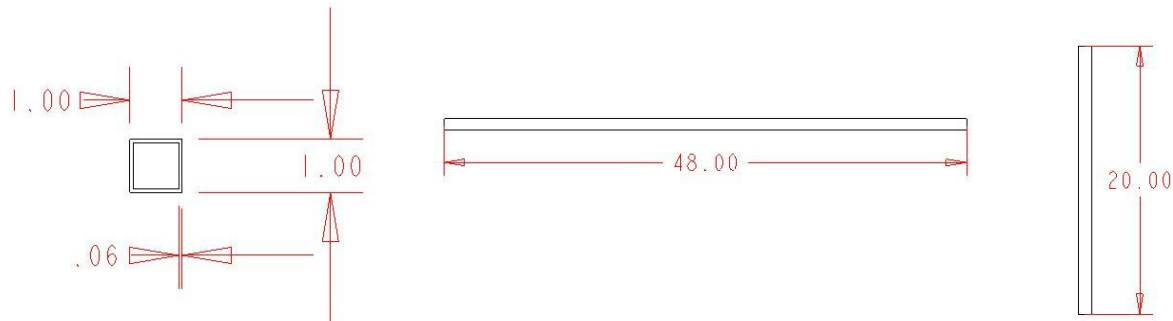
(a) Cross-section dimensions, (b) Horizontal arm dimensions, (c) Vertical arm dimensions
